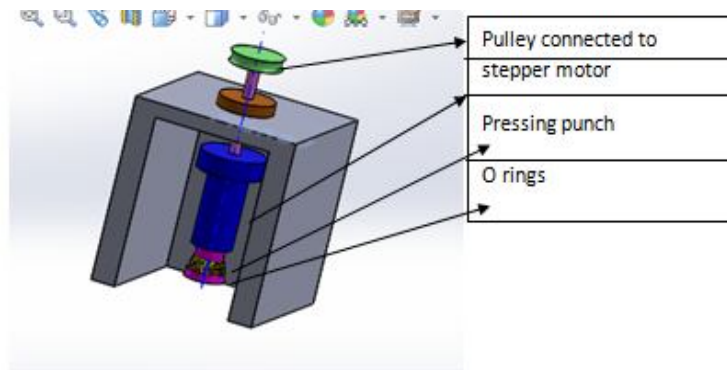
O- ring dispenser unit through the stepper motor: (concept 3)
